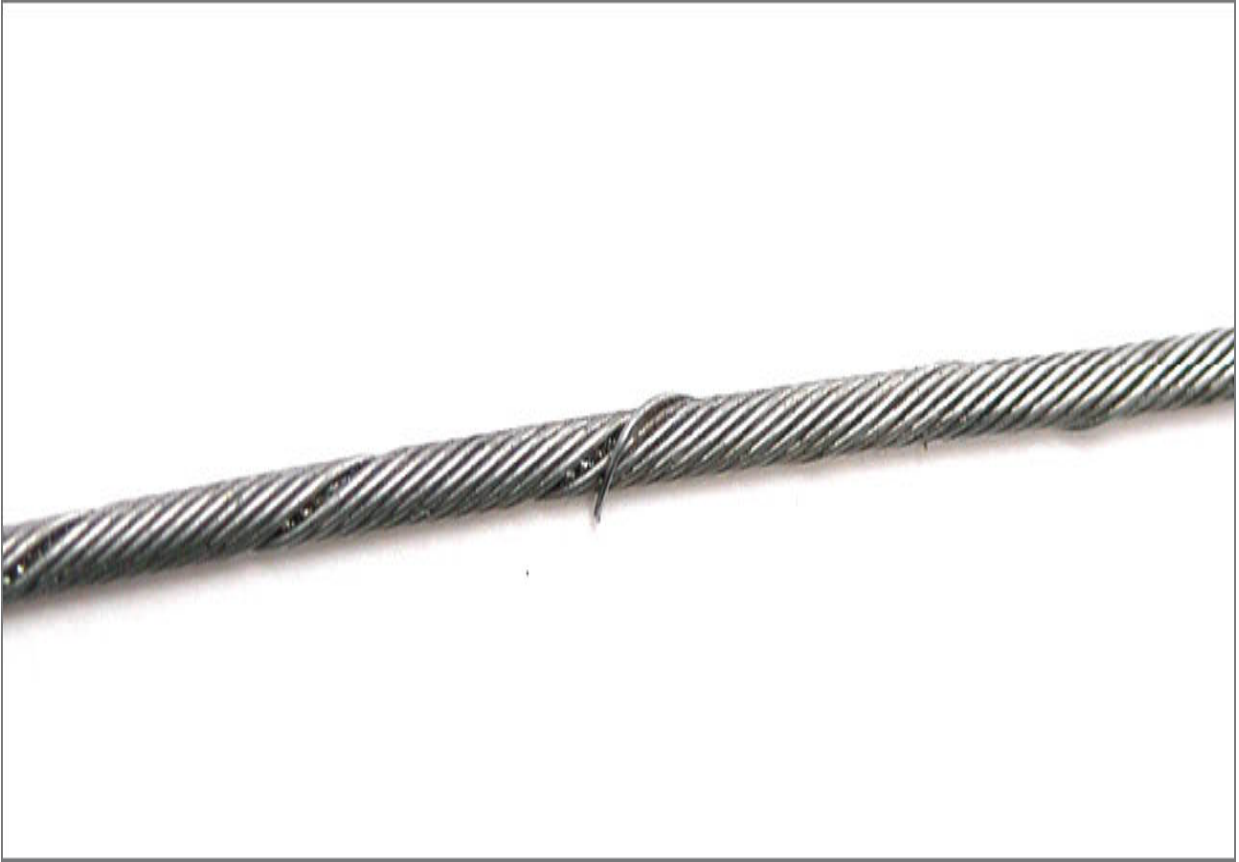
Inspect and replace cables with cut or broken wires
